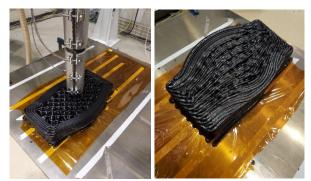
MOLDAM Additive Manufacturing printing a designed part (left). Completed printed part (right).
